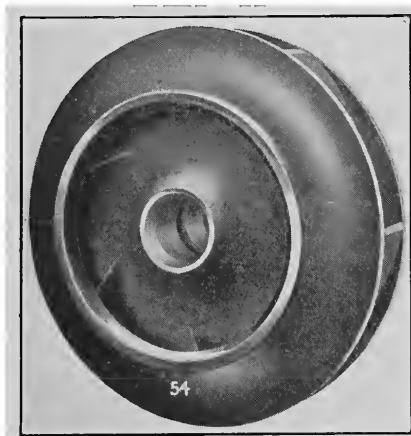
Double suction impeller. (*De Laval Steam Turbine Co.*)
